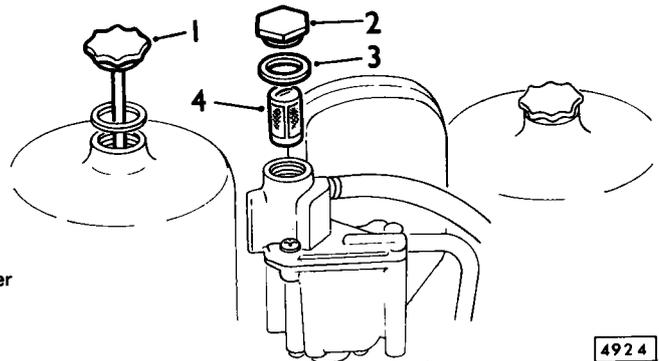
Carburettor piston dampers and Automatic Enrichment Device Filter
